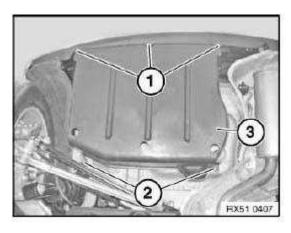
Identifying Underbody Panelling Courtesy of BMW OF NORTH AMERICA, INC.
